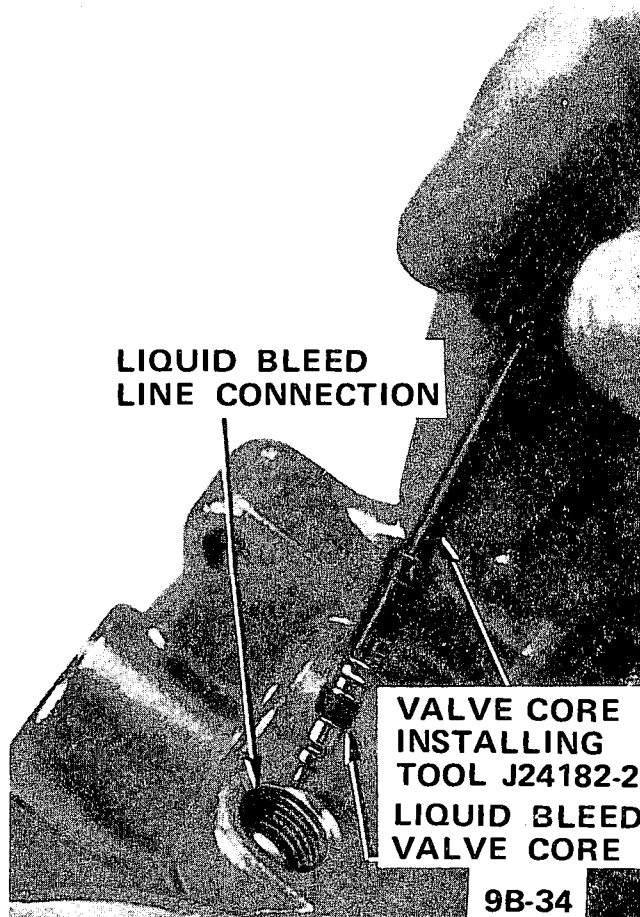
B-24 Installing or Removing Liquid Bleed Valve Core with Tool J-24182-2
